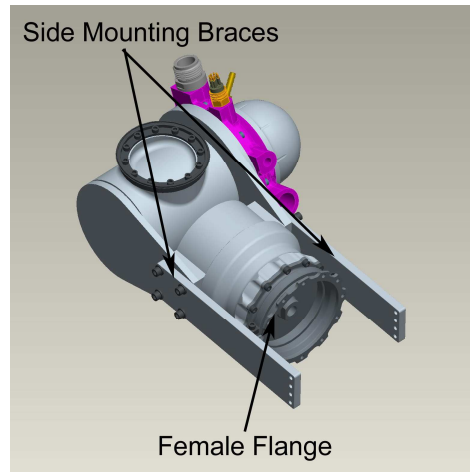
CAD model of wrist joint pair showing flange and braces.
